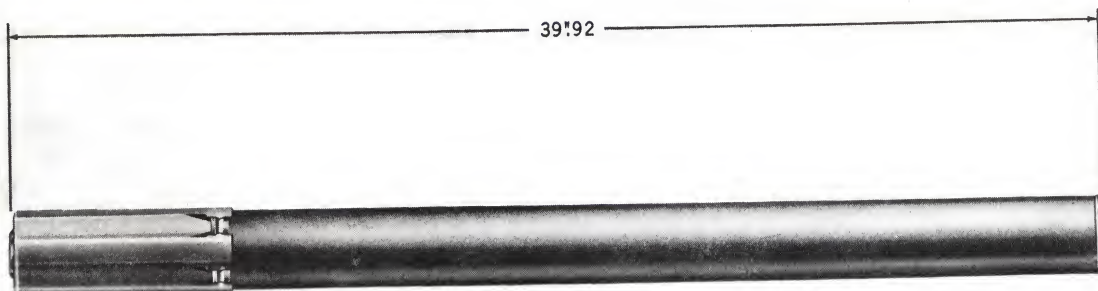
2.75-Inch Rocket Motor Mk 2 Mod 3, External View, With Fin Protector in Place.
